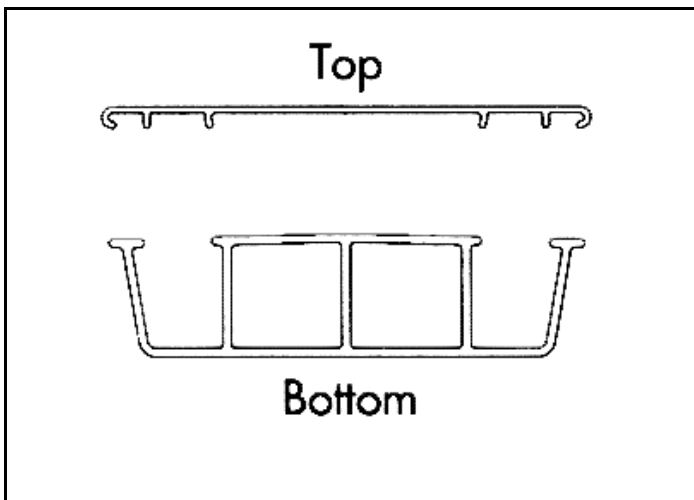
TECK DECK FLOORING COMPONENTS
